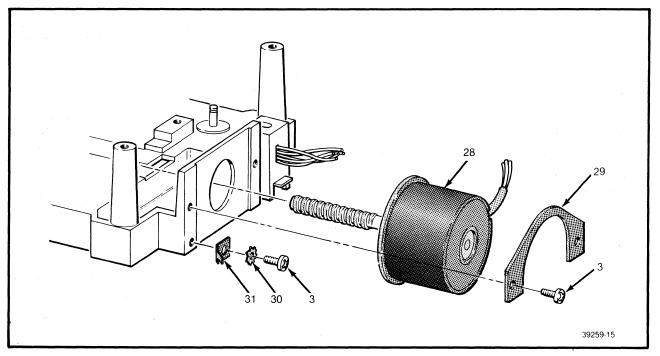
STEPPER MOTOR ASSEMBLY
